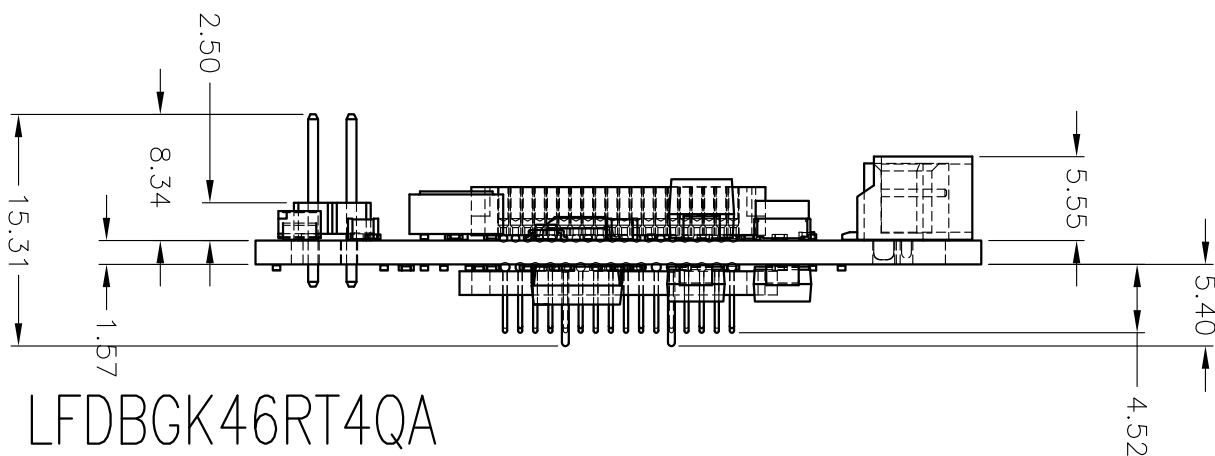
MPC5746R 208 BGA Trace Adapter dimensions (side)
